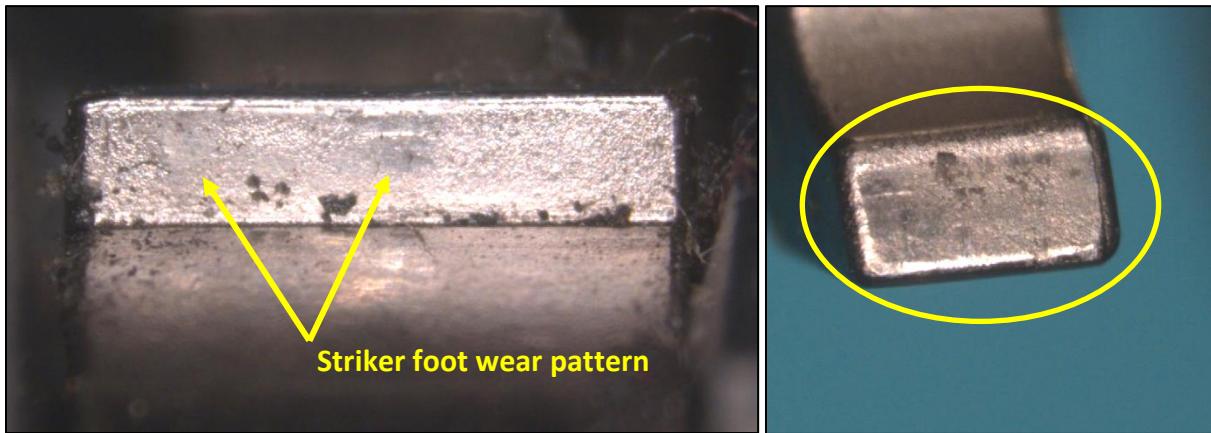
Close ups of sear step (left), and striker foot (right), both unmachined surfaces
